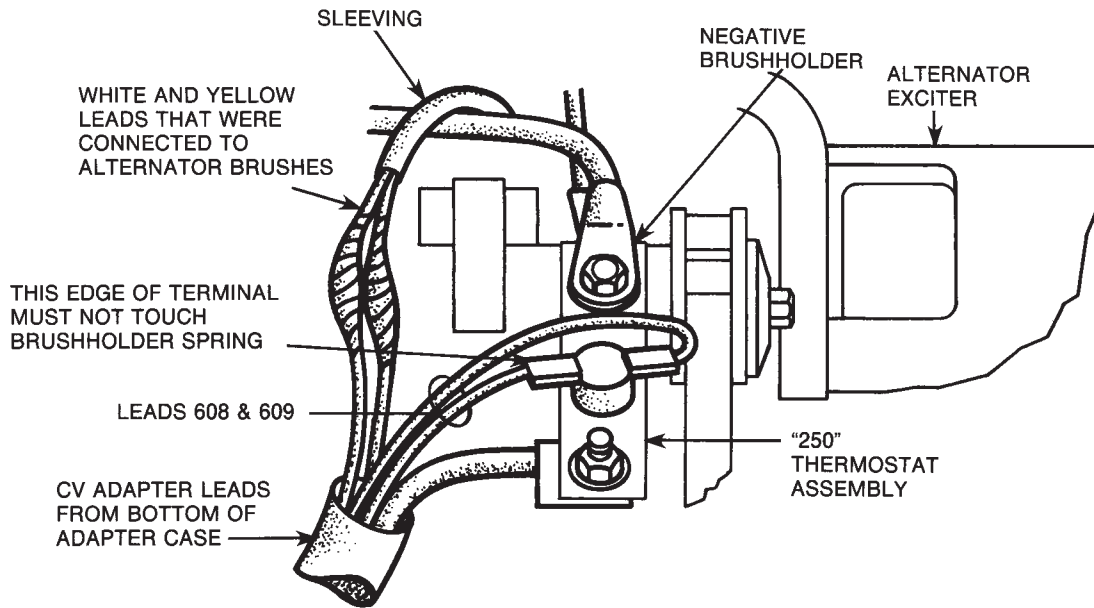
View of Negative Generator Brushholder after Bracket Cover is Removed.
